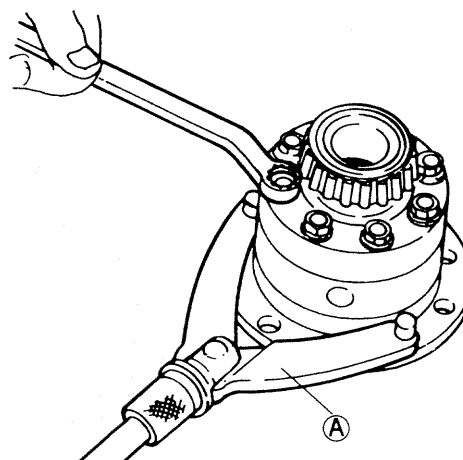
Ⓐ Special tool (Rotor holder 09930-40113)
